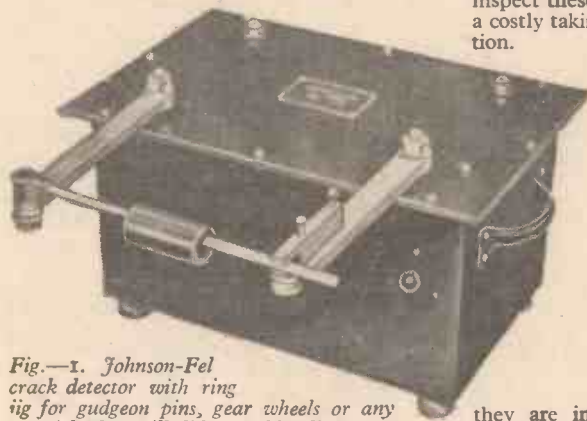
Johnson-Fel crack detector with ring jig for gudgeon pins, gear wheels or any article that will slide over $\frac{3}{16}$ in. dia. bar.
